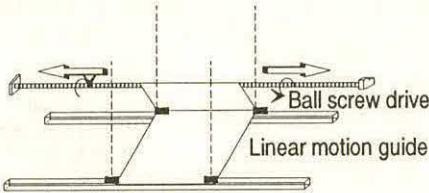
Illustration of the side-to-side movement of the pillar via linear motion guides and ball screws.
